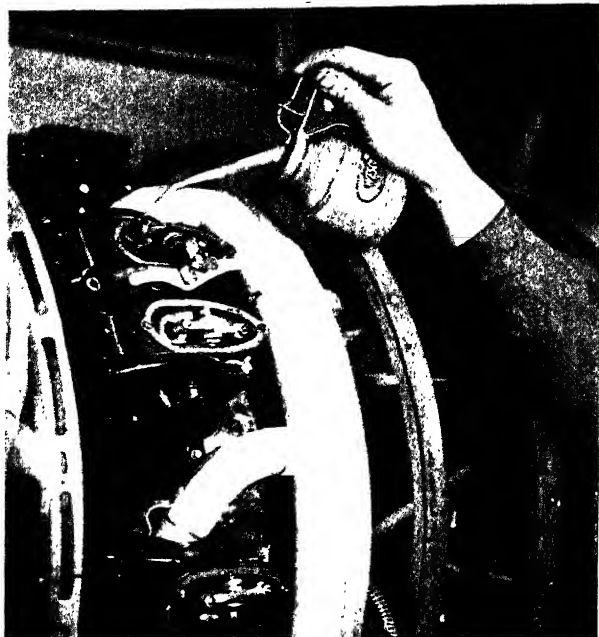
OIL ROCKERS AND VALVE SPRINGS IF DRY
